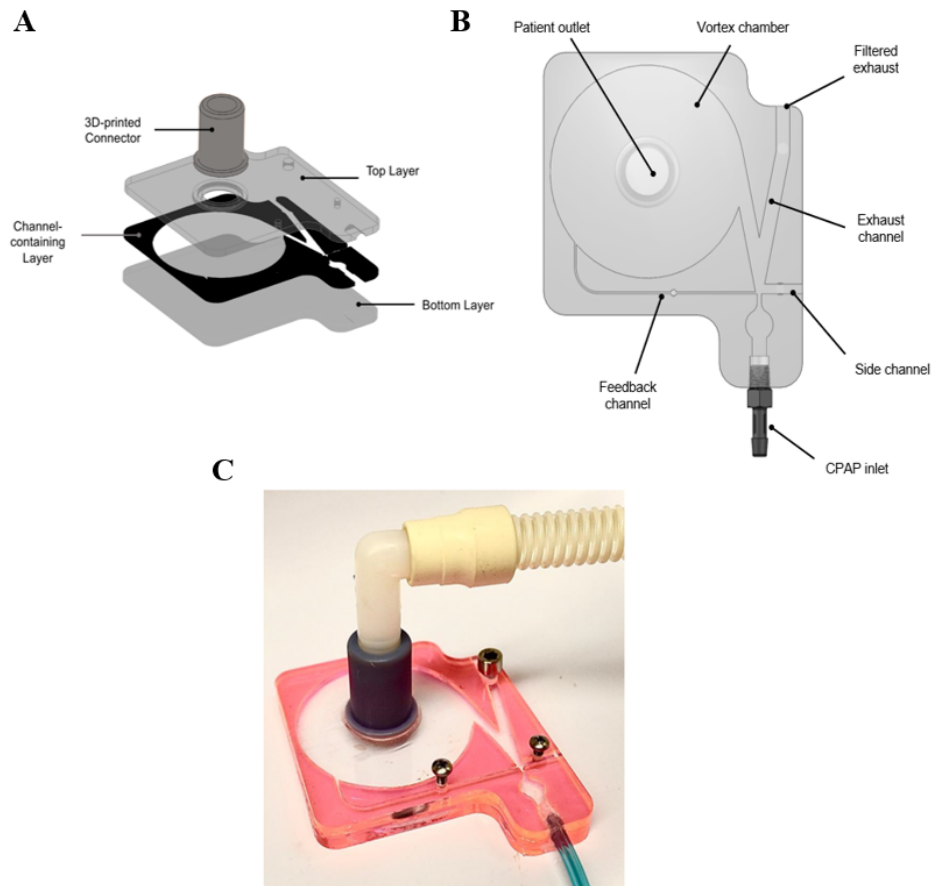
Oscillator assembly consisting of 3 layers of laser-cut acrylic and a 3D printed connector (A). Plan view of the novel oscillator design (B), and final prototype including channel occlusion screws (C).
